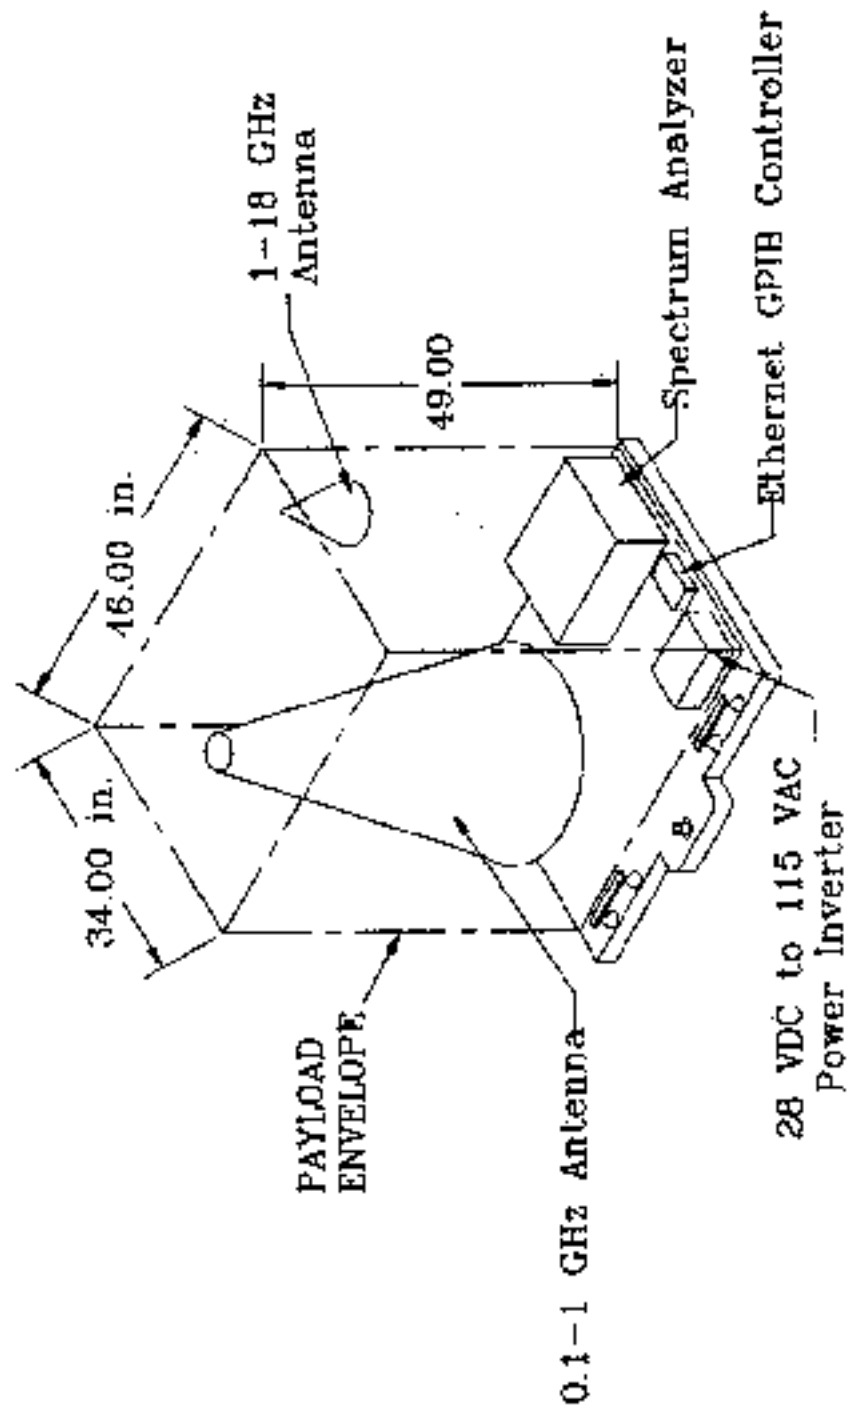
Measurement Package Equipment Configuration (Isometric View)
